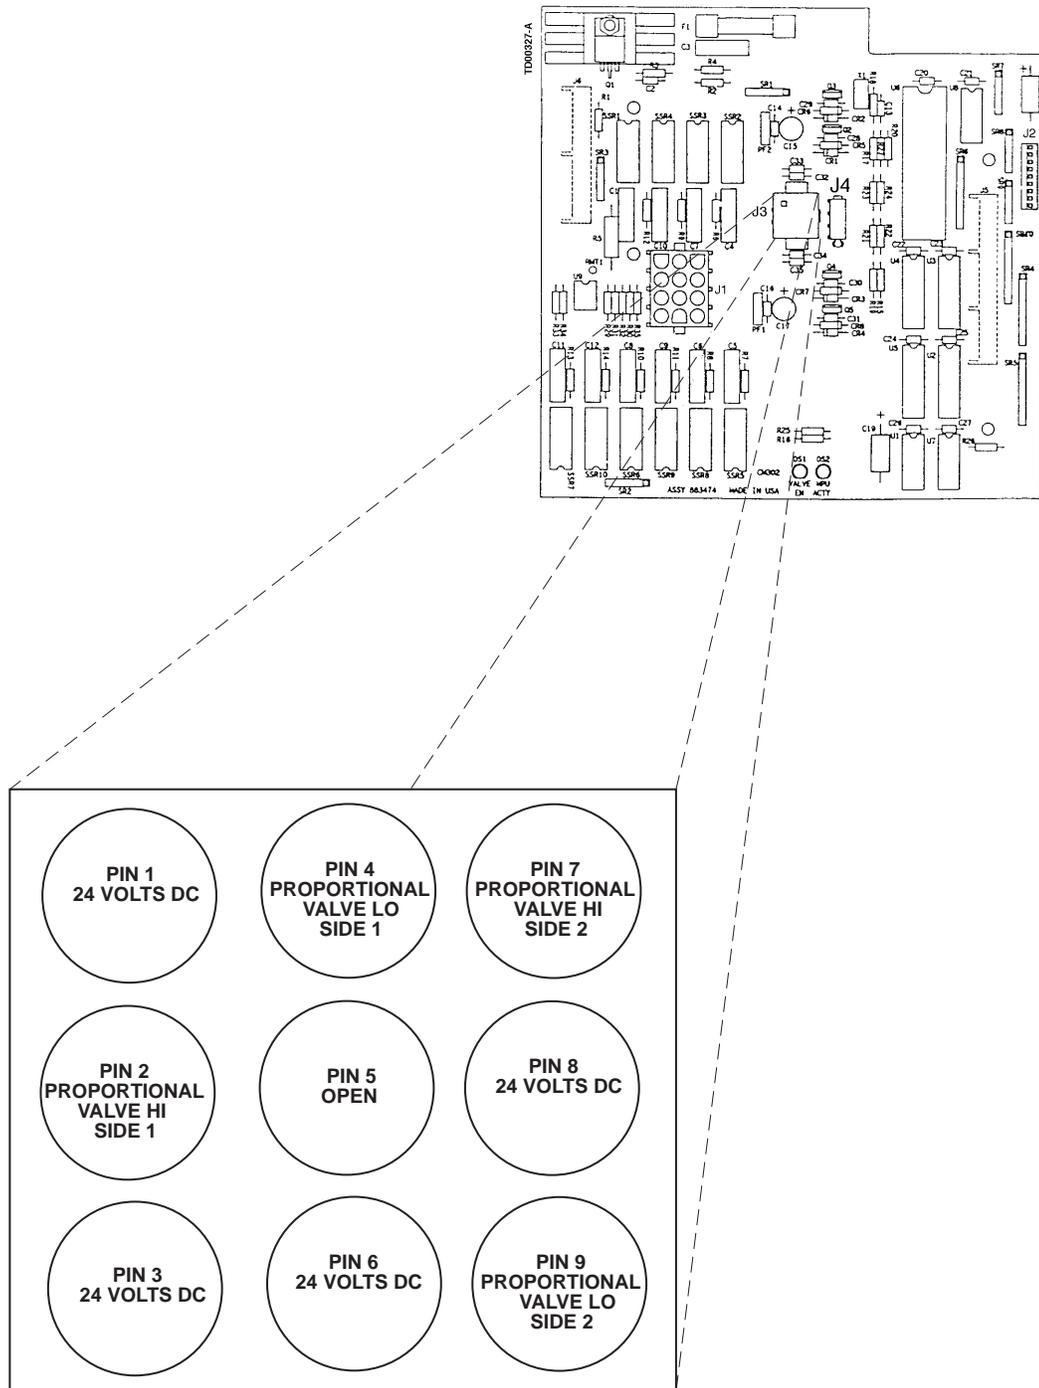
PINOUT CONNECTIONS TO BLENDER SOLENOID DRIVE BOARD - J3.
